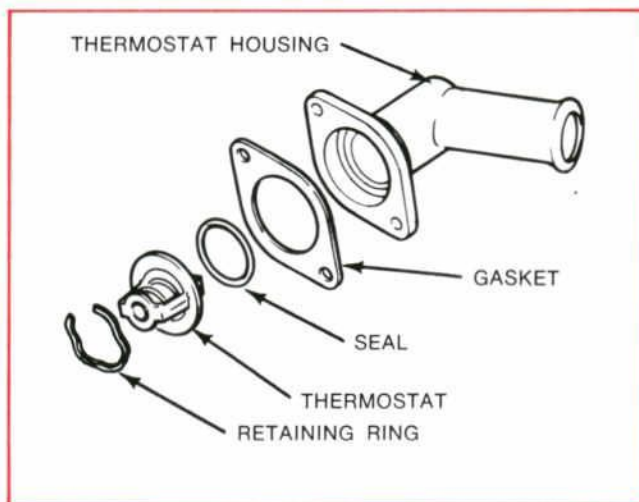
Proper Assembly of the Thermostat to the Housing on the 1971 Pinto Equipped with a 2000 cc Engine.
